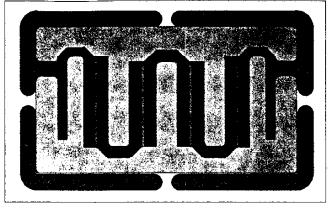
\cdot Circuit board layout for milling with the LPKF machine.
